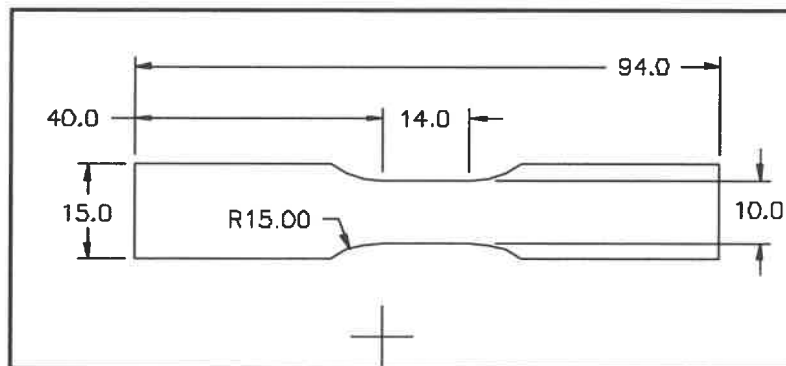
Geometry of the axial fatigue specimens (all dimensions in millimeters).
